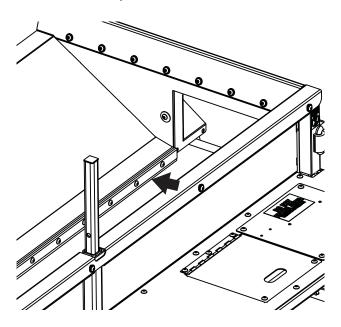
Hopper Rubber Flashing to Conveyor Belt Clearance
